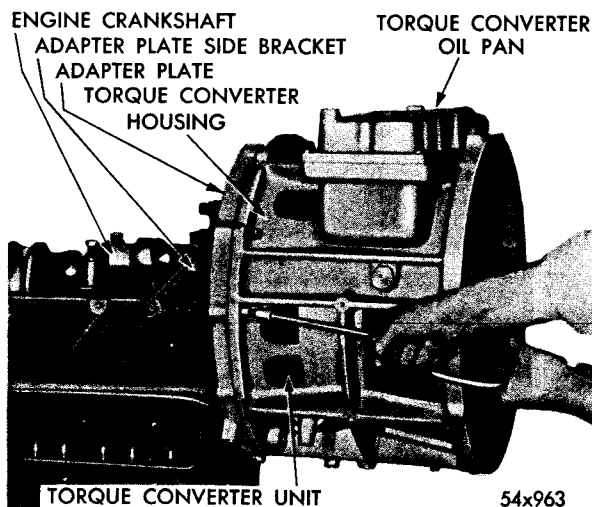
Installing the Torque Converter Housing on the Adapter Plate
